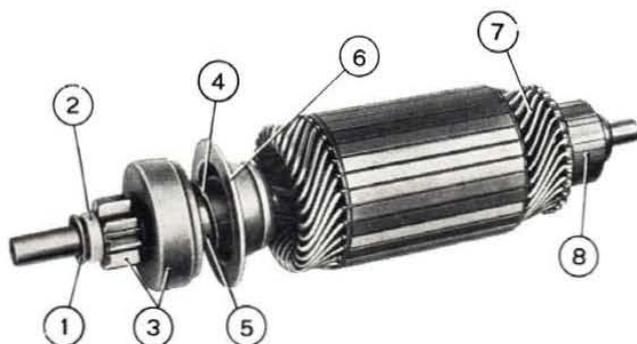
Armature assembly with overrunning clutch drive mechanism.
